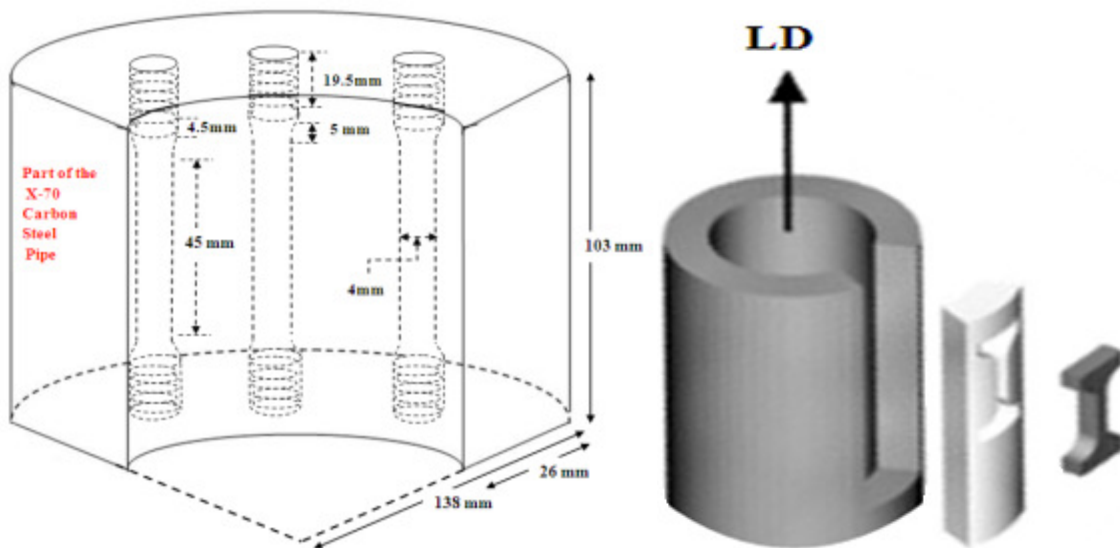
Three dog bone X-70 carbon steel samples with threaded parts at two ends made from a part of X-70 carbon steel pipe
